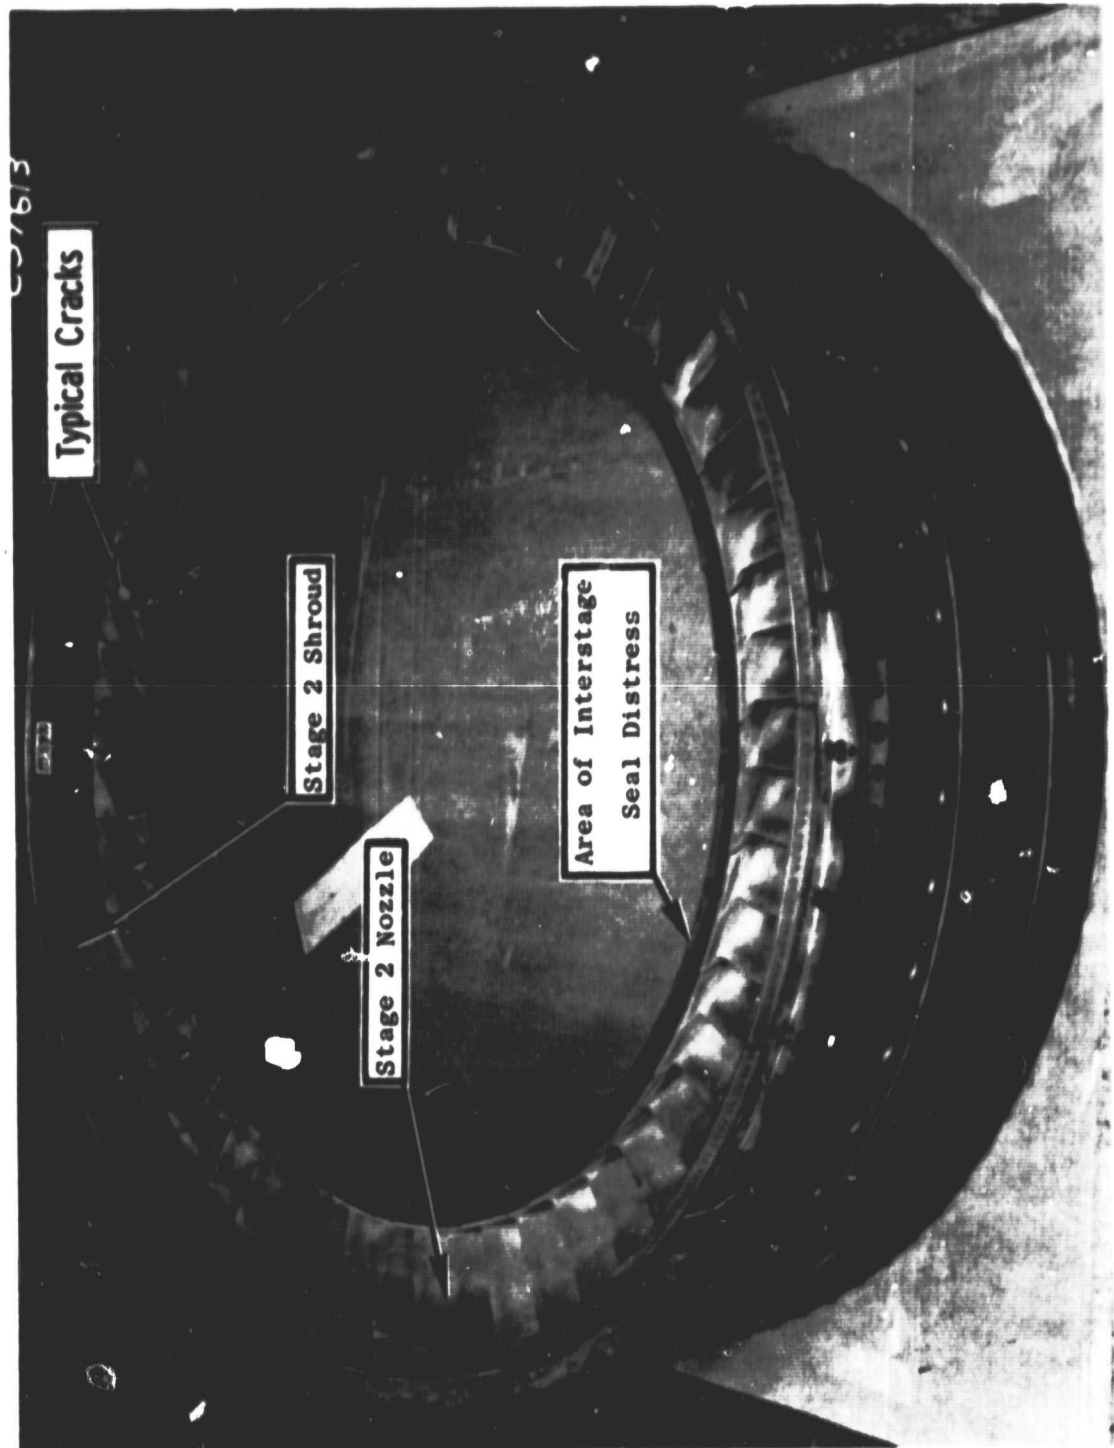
Aft View of Stage 2 Nozzle Assembly.
